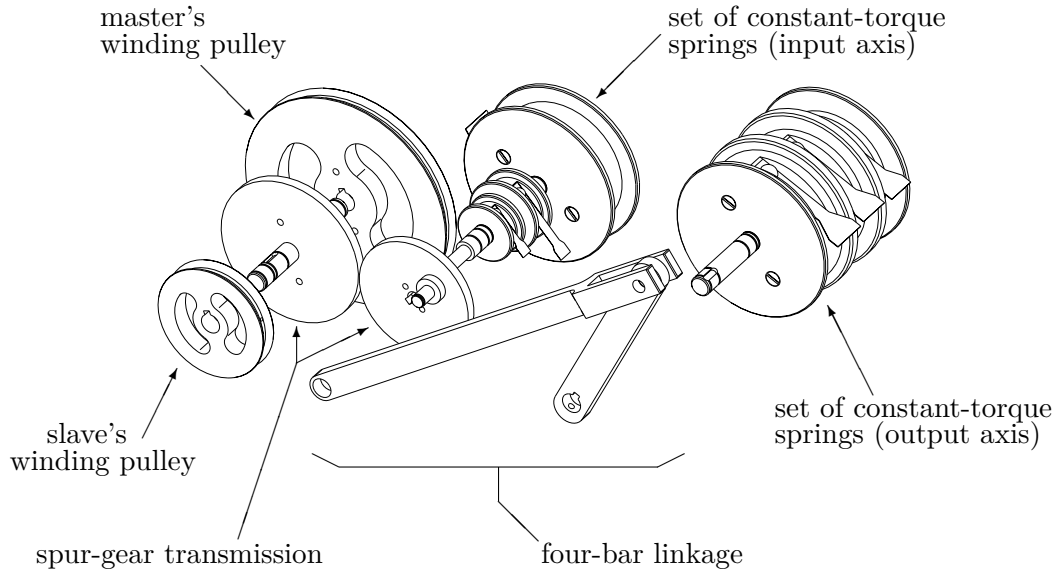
An exploded view of a CAD representation of the main components of the nonlinear spring assembly.
